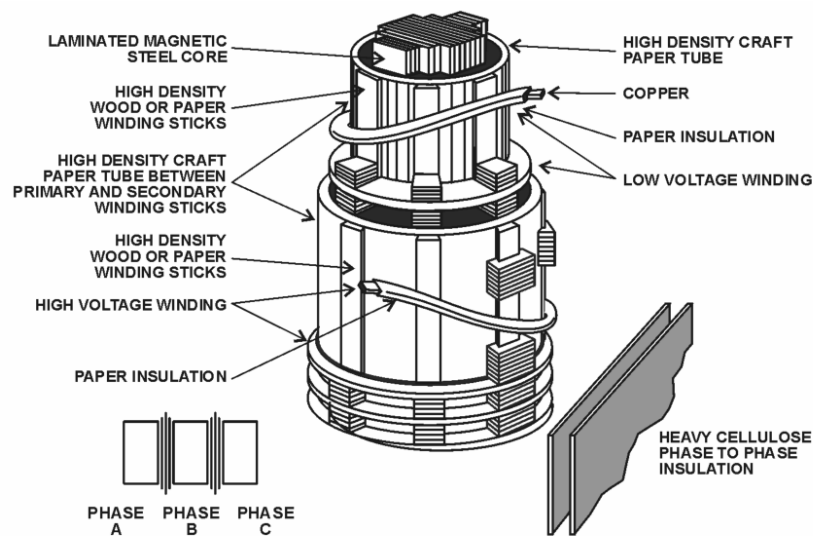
Core-type power transformer winding scheme. Taken from [8]
